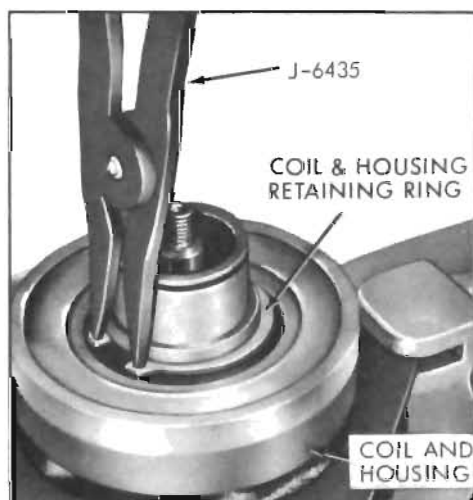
Removing and Installing Coil and Housing Retainer Ring
